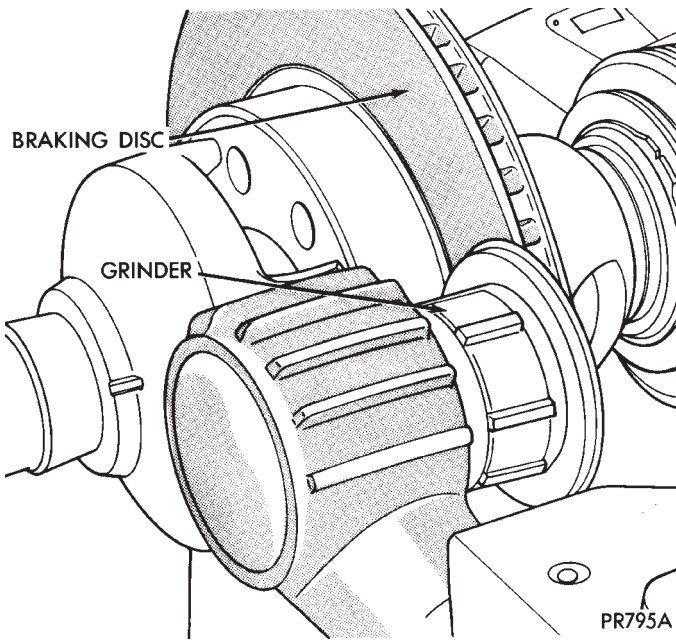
Resurfacing Brake Rotor (Final Finish)
